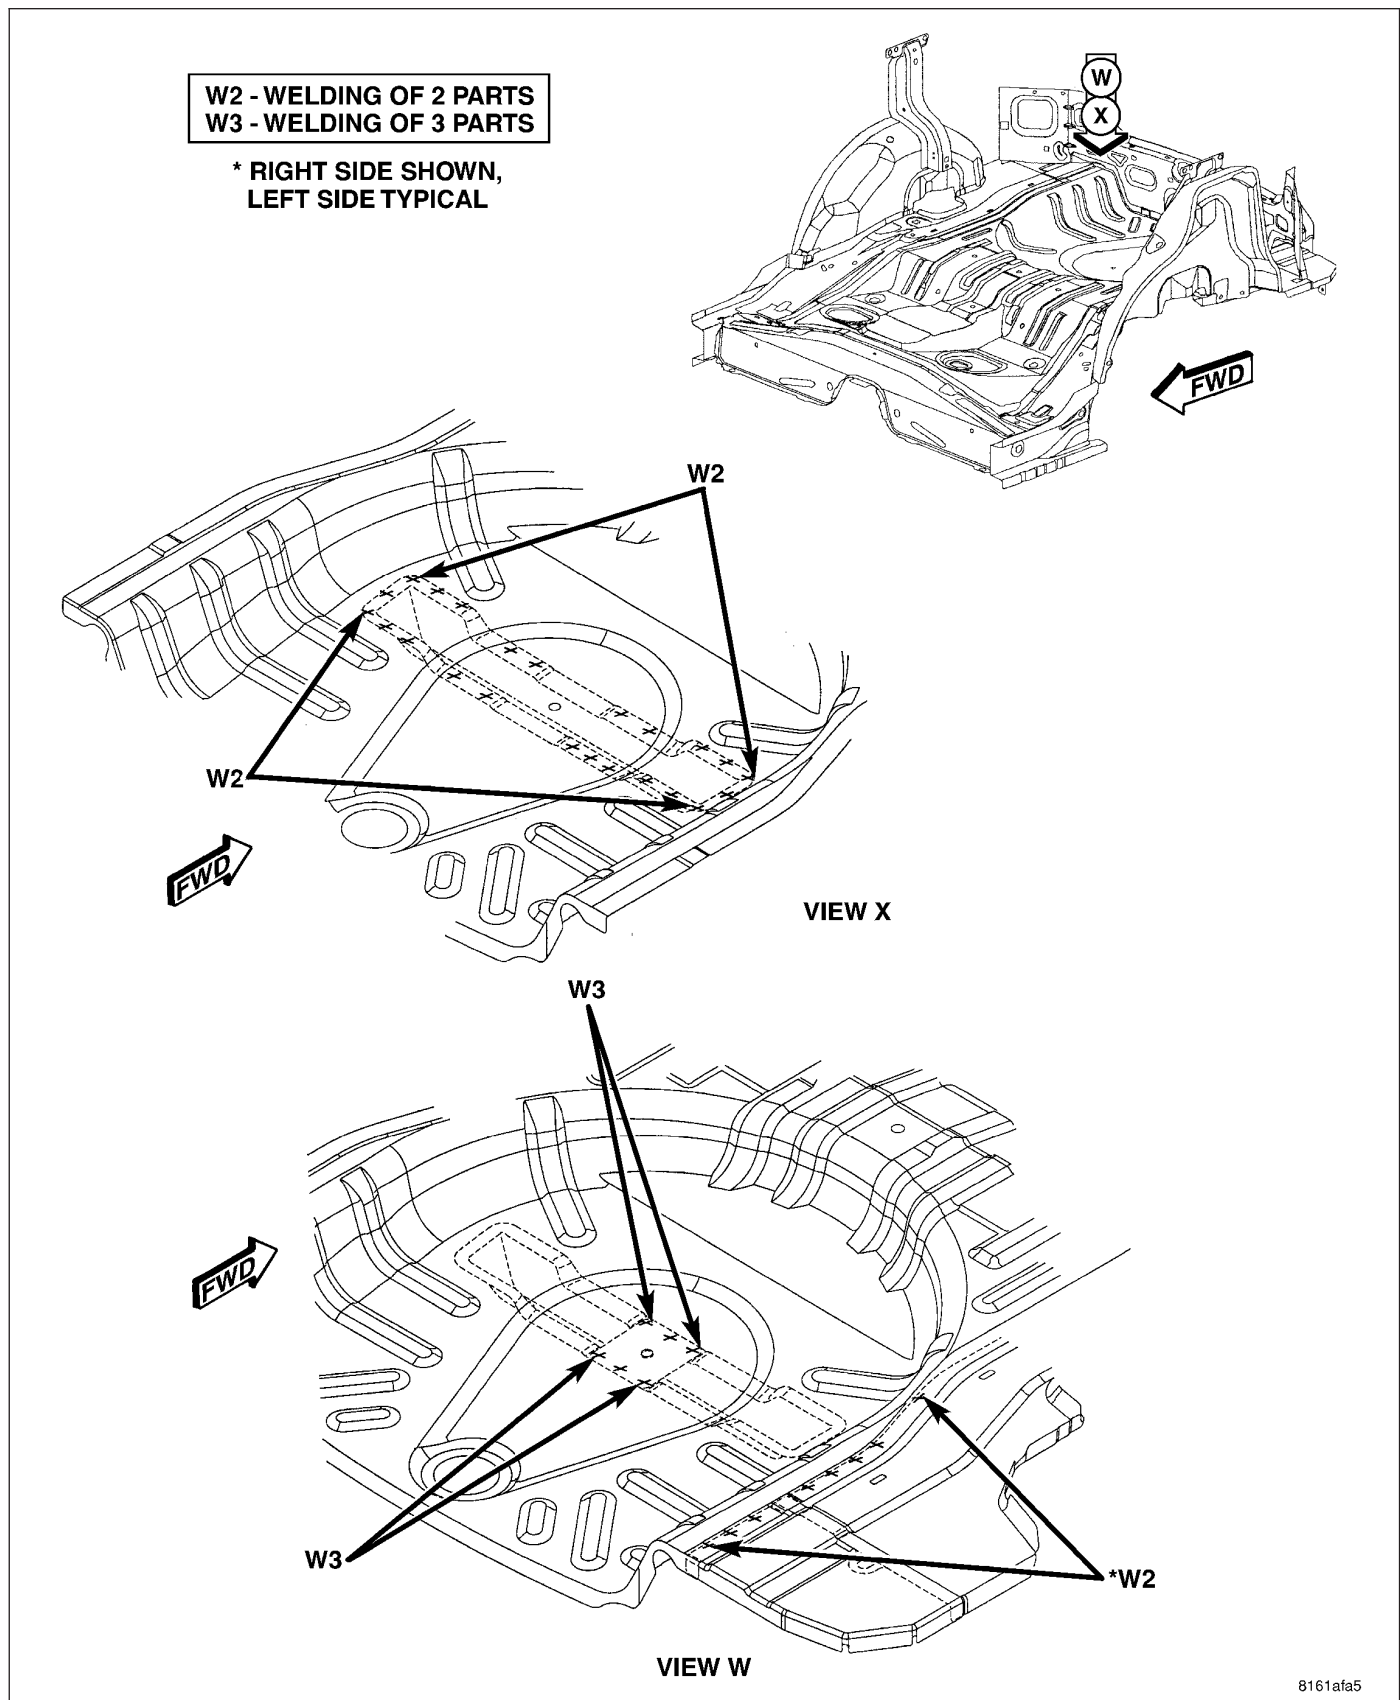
REAR FLOOR ASSEMBLY (2 OF 14)
